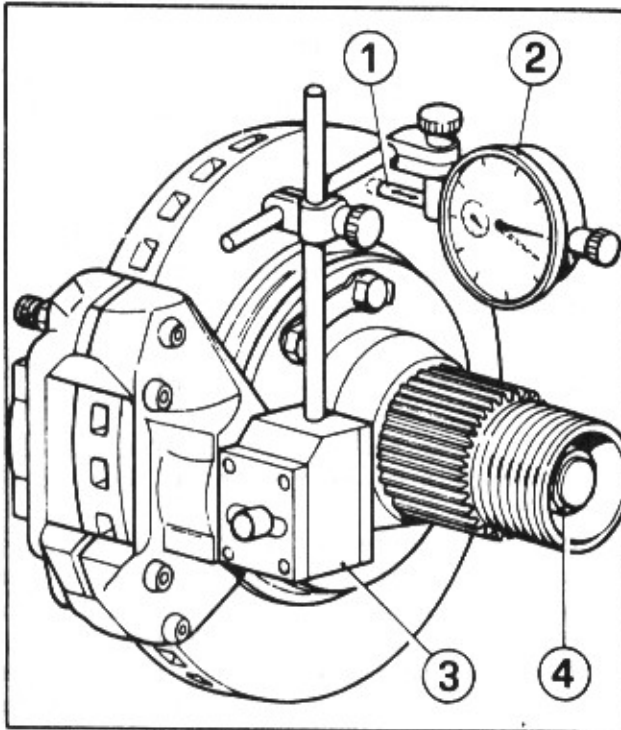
Check of Tapered Roller Bearings Axial Clearance
